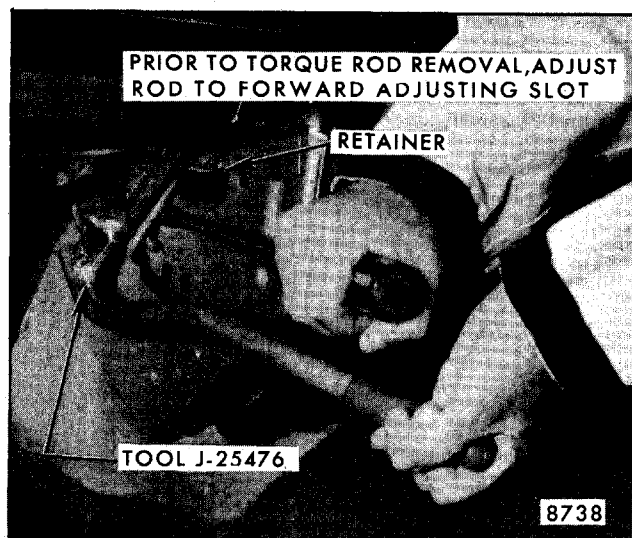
Torque Rod Tool Engagement - Cadillac "K" Style
